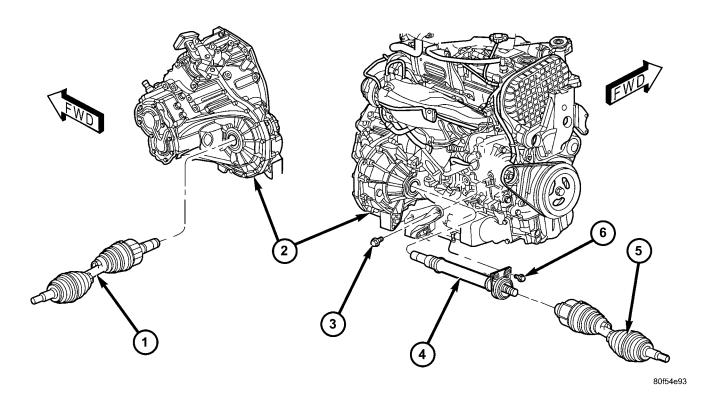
Halfshaft and Intermediate Shaft—2.4L Turbo Models
